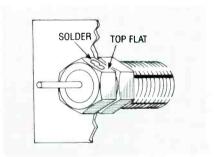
HERE'S A TIP FOR constructing a RFI shield. Before soldering the copper tape to the nut flats, tin the flats with a little solder first. The relay is on the underside of the PC board as viewed from this angle.
